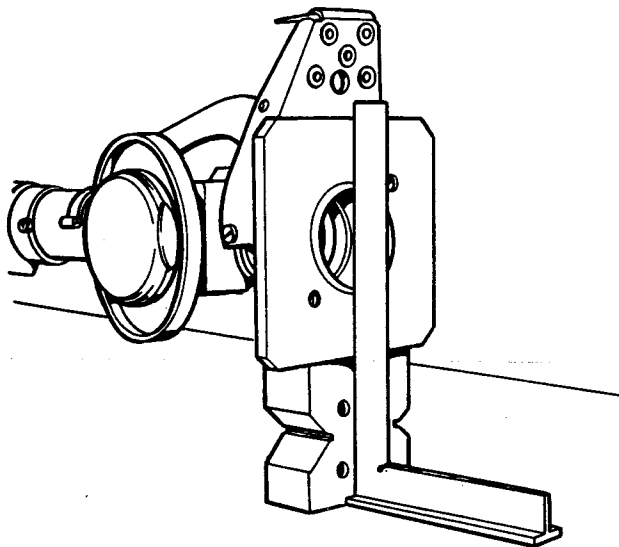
Checking Rear Axle Beam for Horizontal Deformations with Angle Gauge Applied to Outer Face of Flange A.70172
